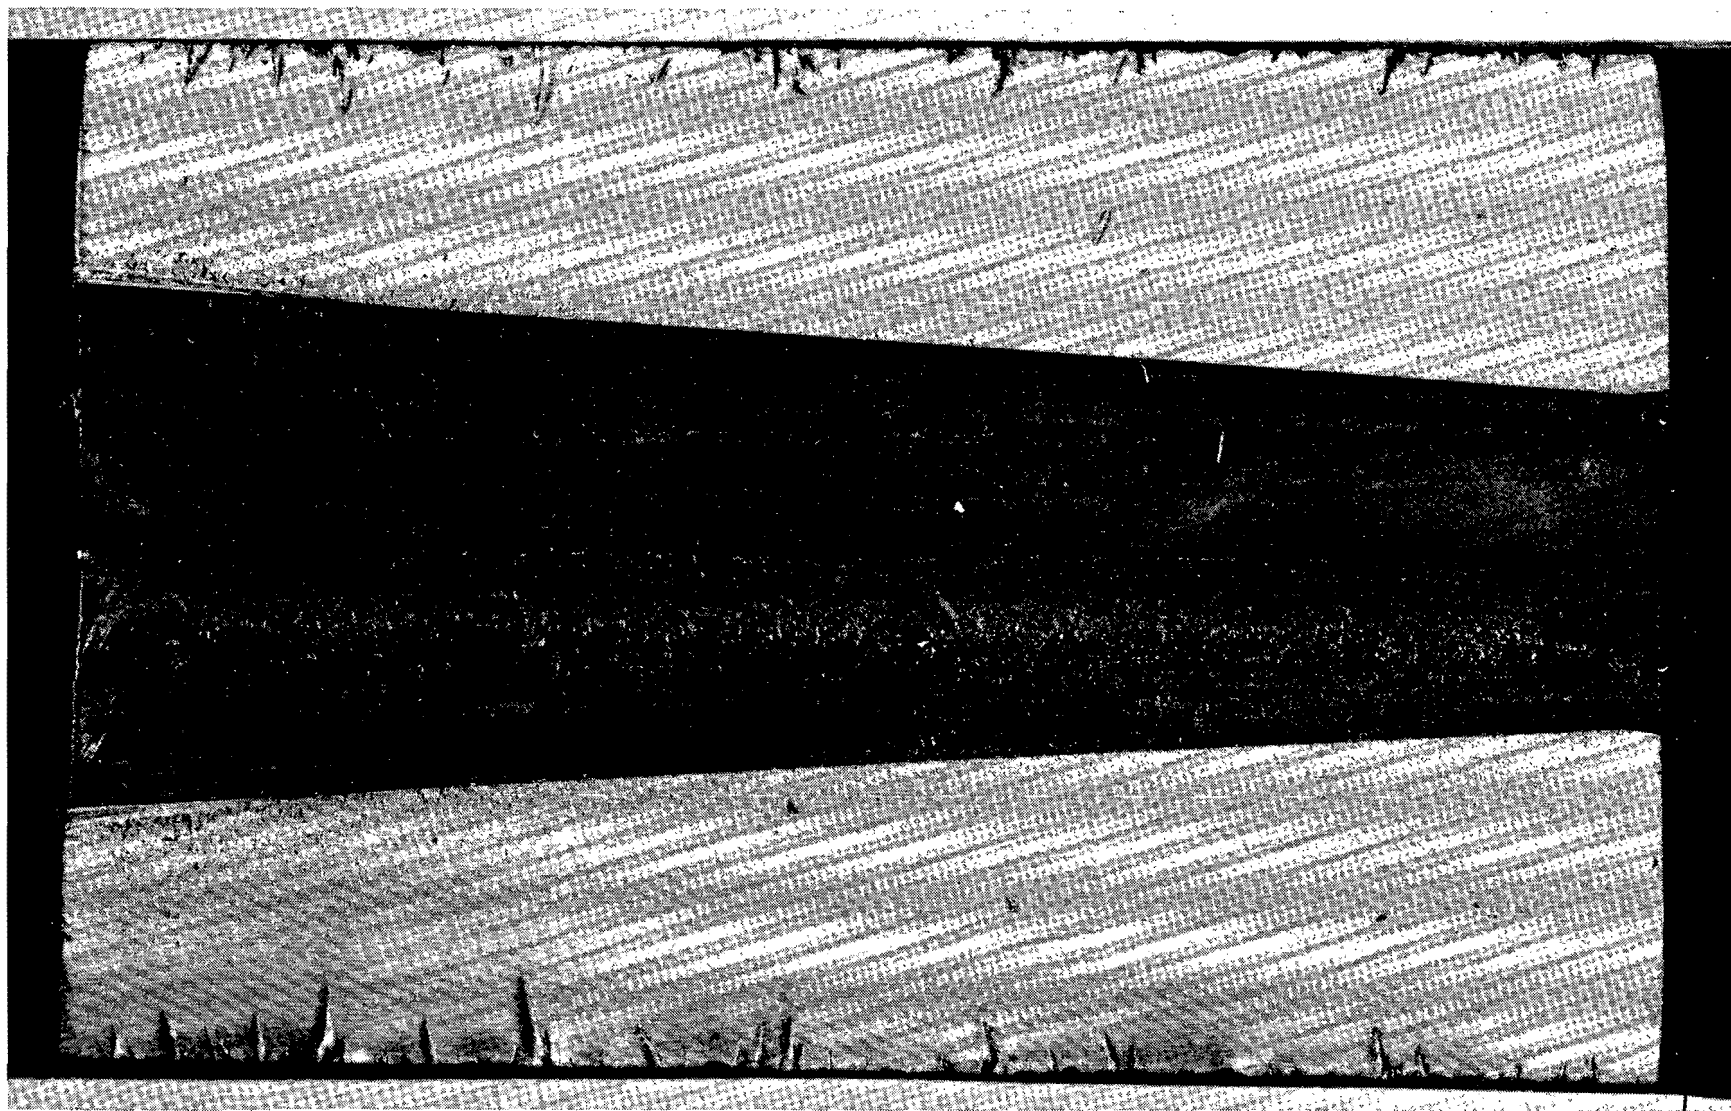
Fracture surface 70 mm specimen (scale 1:1).
